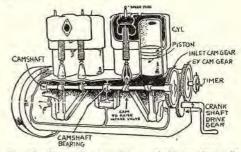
Illustrating how the cam shaft on a four-cylinder engine is operated by timing gears; also how the nose of the cams raises the valves. There are two cam shafts placed opposite, therefore it is a "T"-head type.
